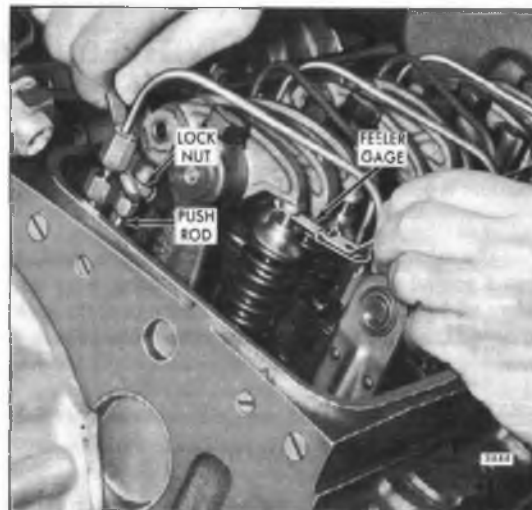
Adjusting Valve Clearance (Two Valve Head)
